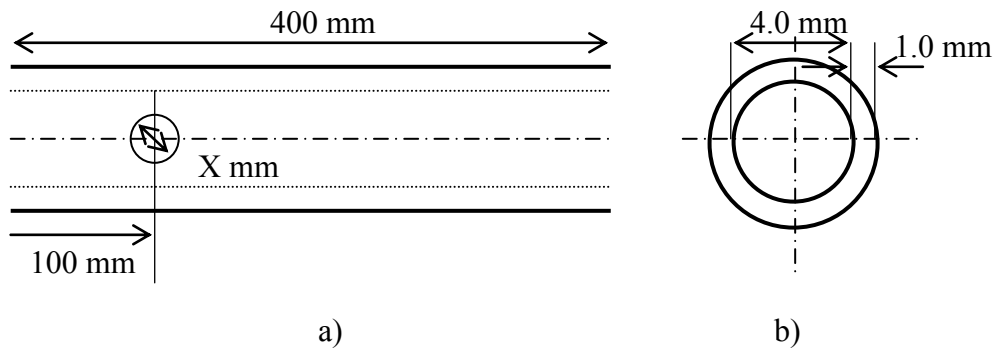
Hole diameter test sample a) longitudinal cross section b) end view
